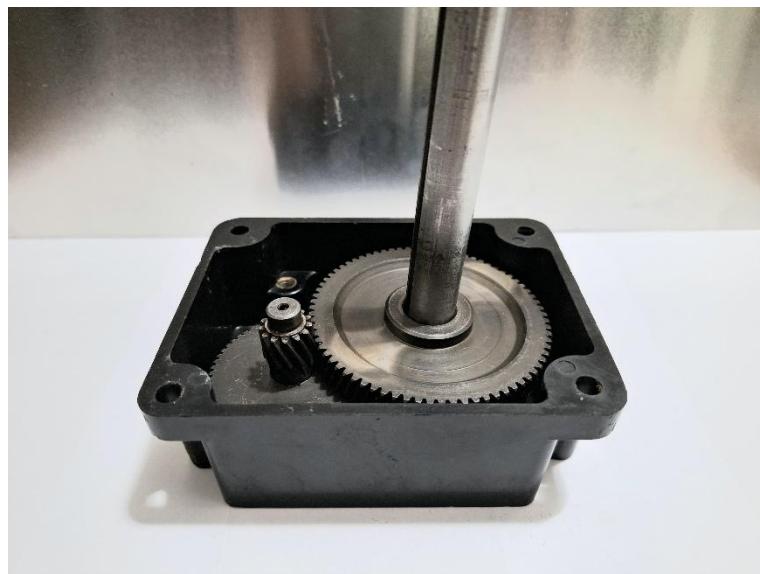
Helical Gear Wheels for Drive Speed Reduction
